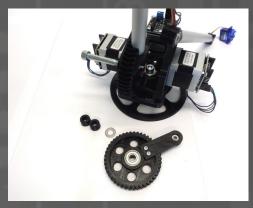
Slide in the M8x70 mm bolt and add the short M8 spacer (32) (see fig. 16) and main gear. Keep the servo cable accessible.
